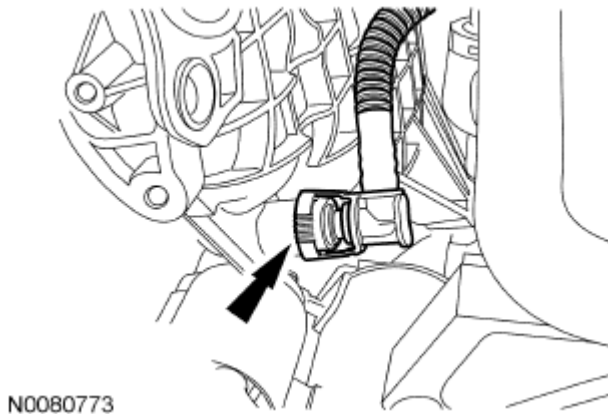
Locating Crankcase Vent Oil Separator Tube
